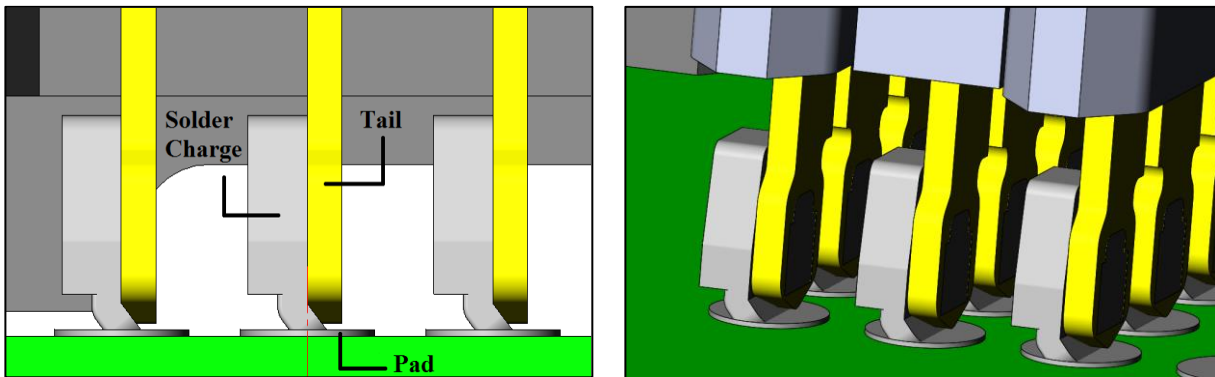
SEAF8-RA Solder Charge Aligned with PCB Pad
